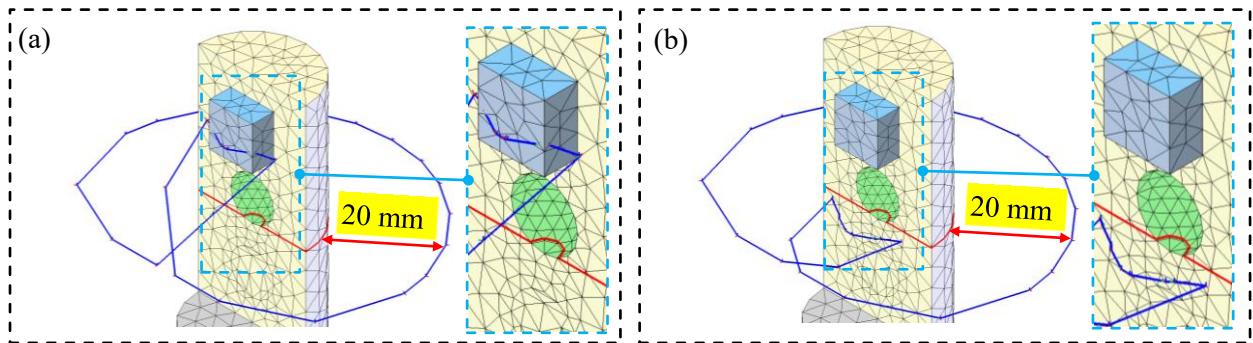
Surface laser cleaning path of the test workpiece, robot pose: (a) before correction, (b) after correction.
